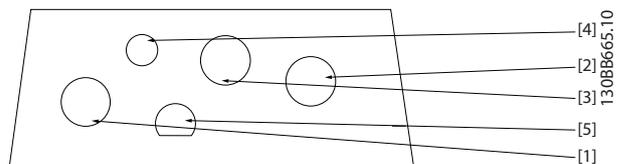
A4 - IP55 Threaded Gland Holes
